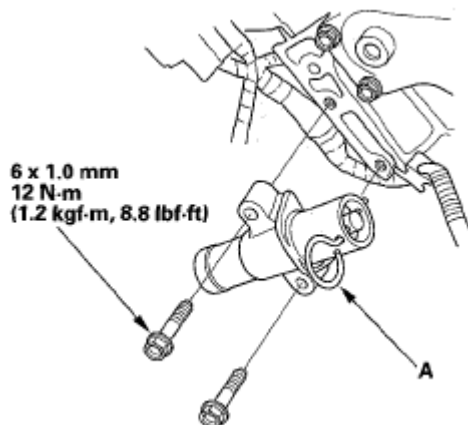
Identifying Auto-Tensioner Pin With Torque Specifications
